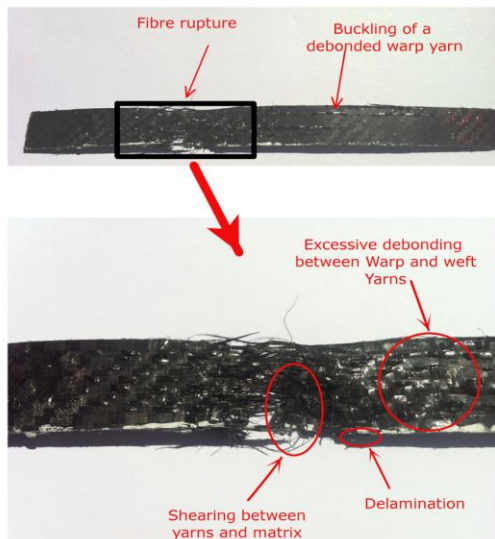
Incorporated failure mechanisms in uniaxial extension of [0 deg, 90 deg] SRPP specimens
